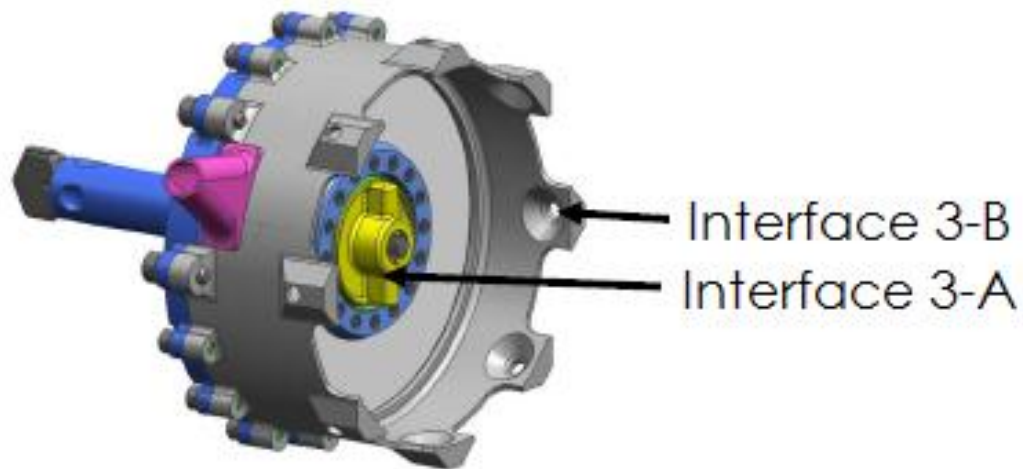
Interface, Drill Bit Assembly to Robotic Arm
